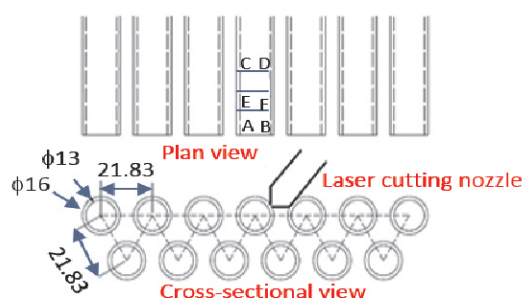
Layout for laser cutting of SG tube and SG tube matrix.
